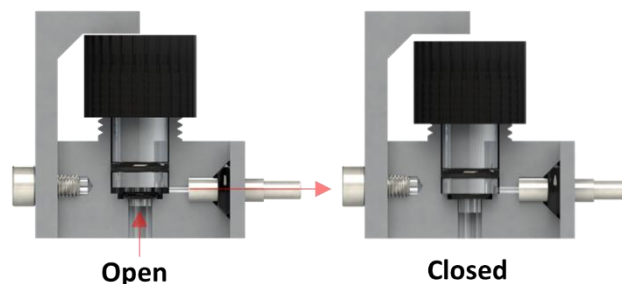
A 3D-CAD cross-sectional view of the high-vacuum valve
